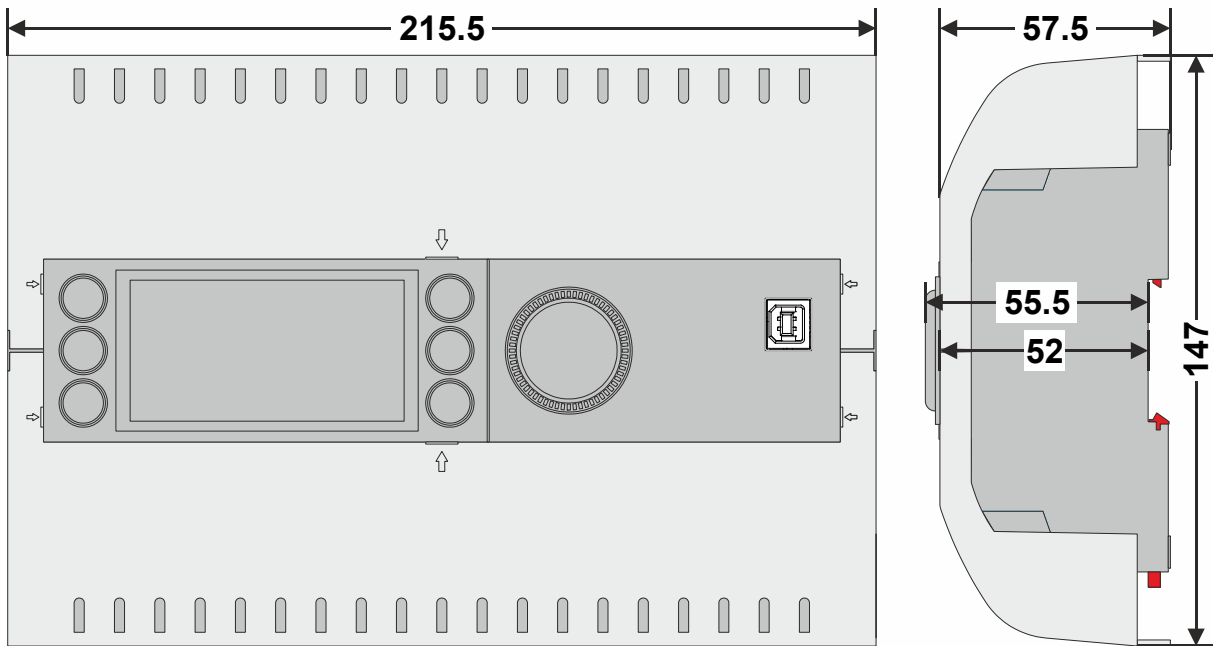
EAGLE Controller (shown here with two MVC-80-AC1 covers in place), dimensions (in mm)
